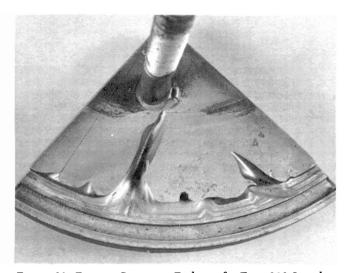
Erosion-Corrosion Failure of a Type 316 Stainless Steel End Closure from a Combination of Catalyst Particle and Corrosive Gas Leakage.
